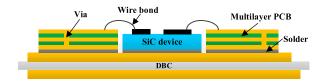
Cross-sectional view of DBC and PCB hybrid structure.
